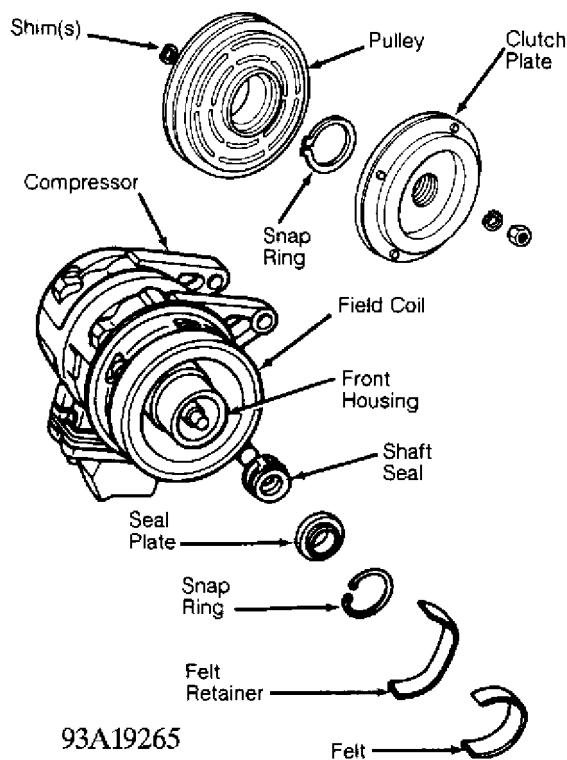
Exploded View Of Compressor (Nippondenso 10-Cylinder)
